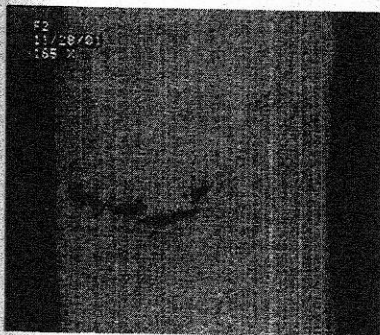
Example of formicary type corrosion of a copper tube in the bending zone.
